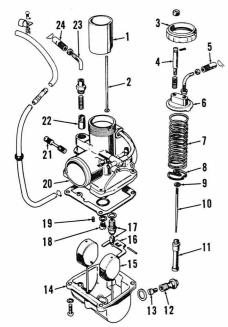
Exploded view of typical carburetor used on F5 and F8 models.
